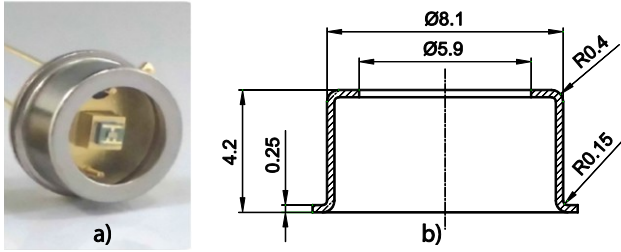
The metal can TO-39: a) UV emitter MTE-F13 (MARKTECH); b) Dimensions of TO-39 can [26].
